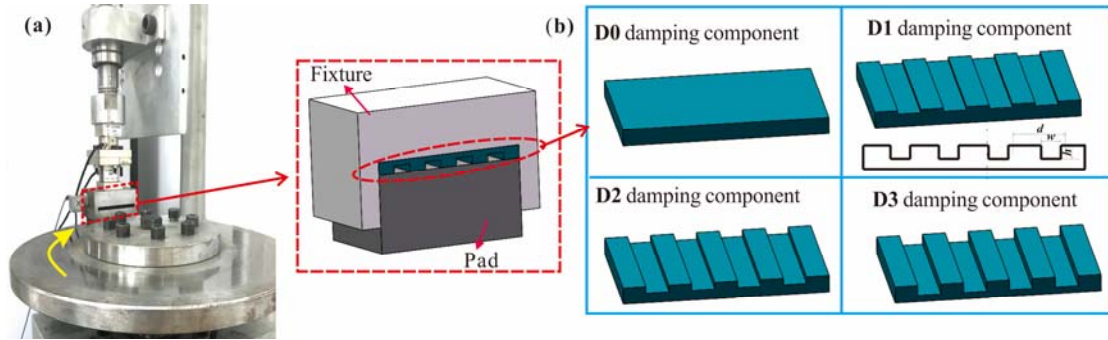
Mounting location of the damping components (a) and structural drawing of the damping components (b)
